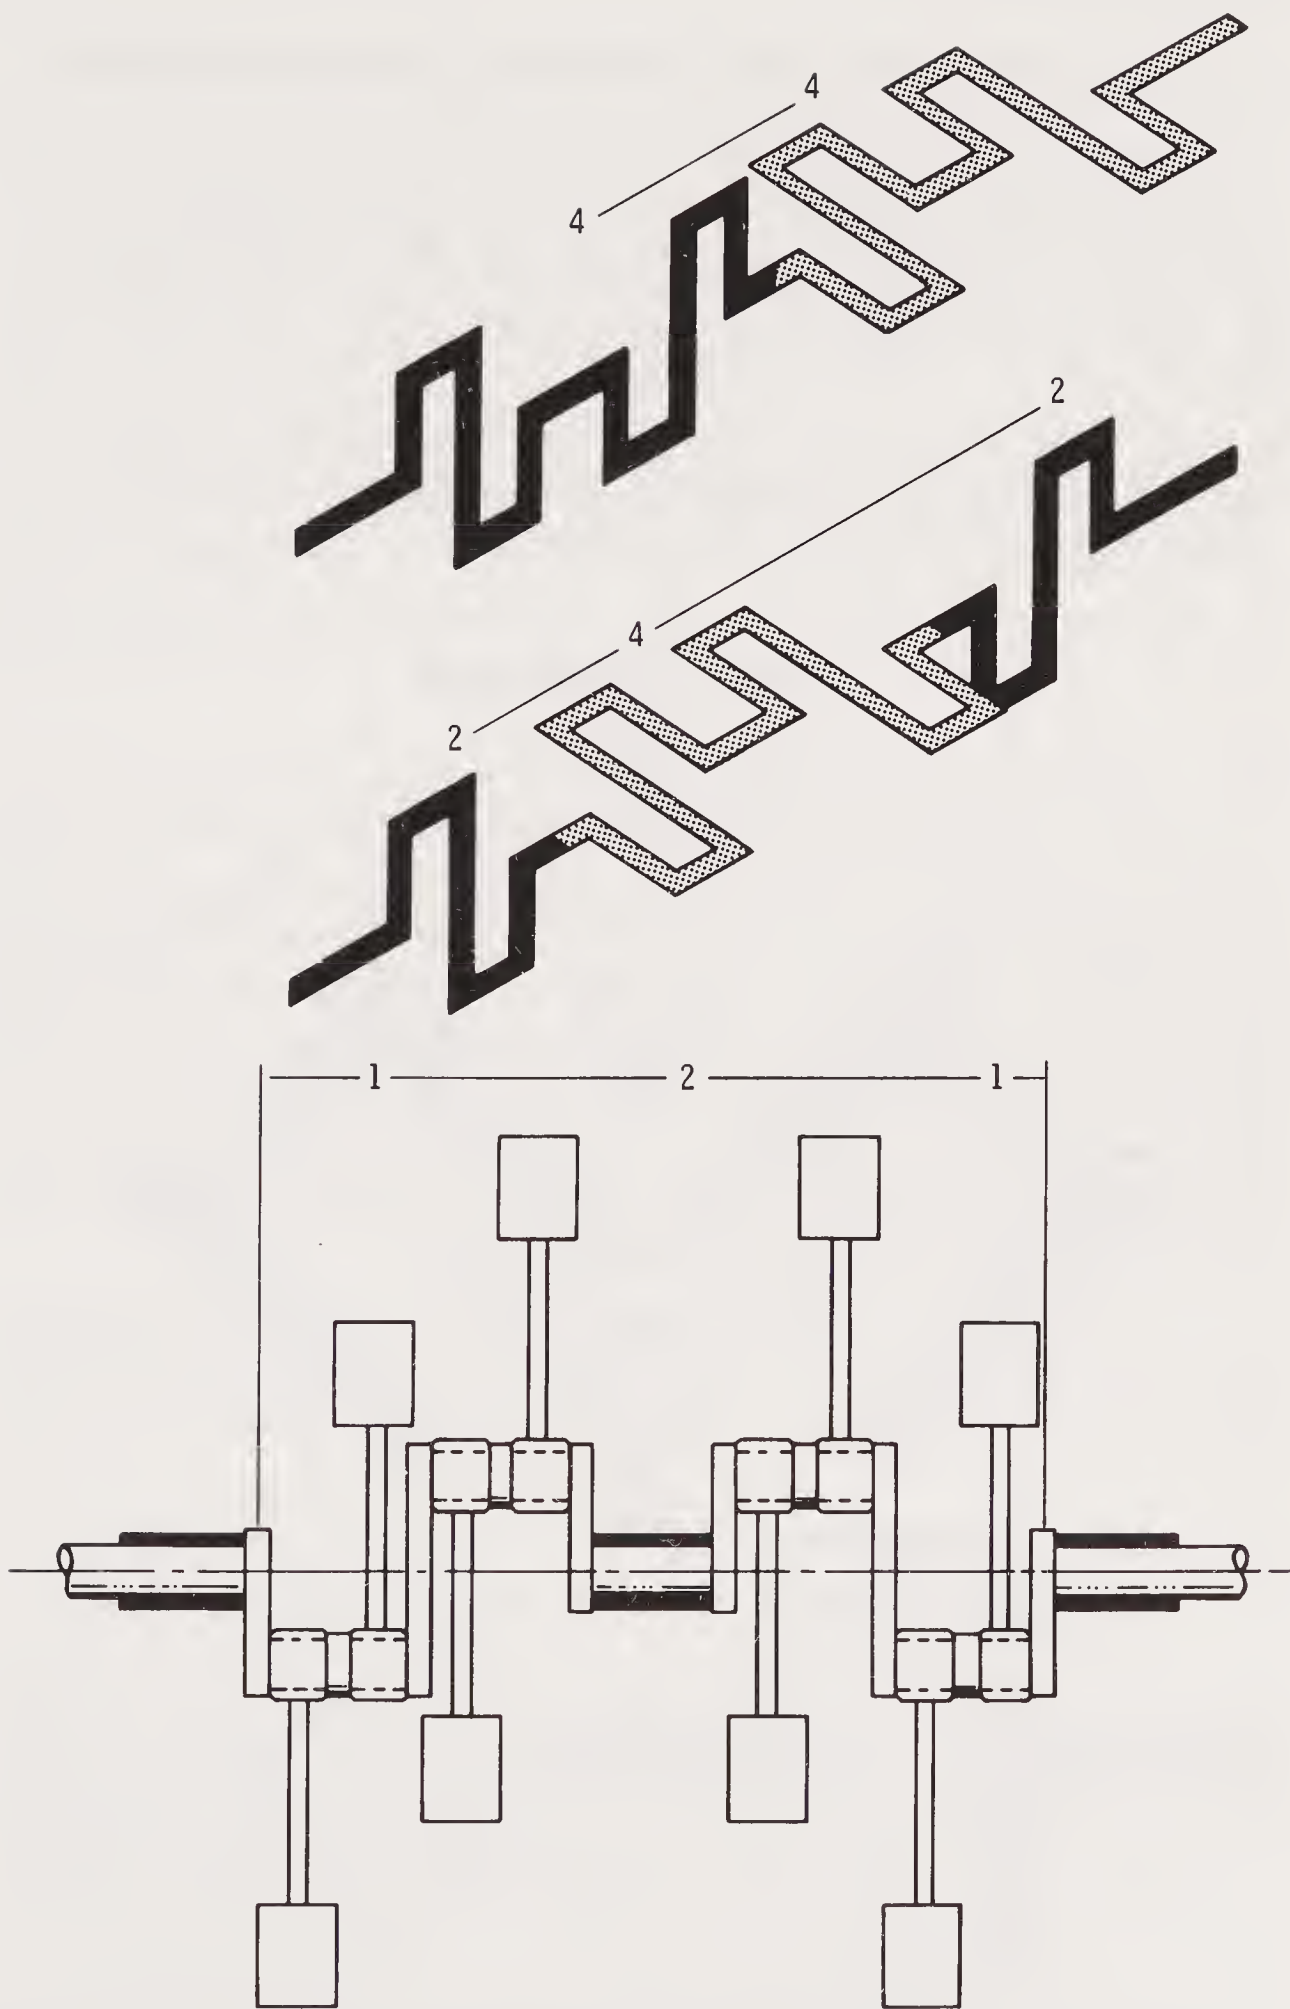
Two crankshaft arrangements for an eight-cylinder engine illustrating the 4-4 and 2-4-2 sequence.
